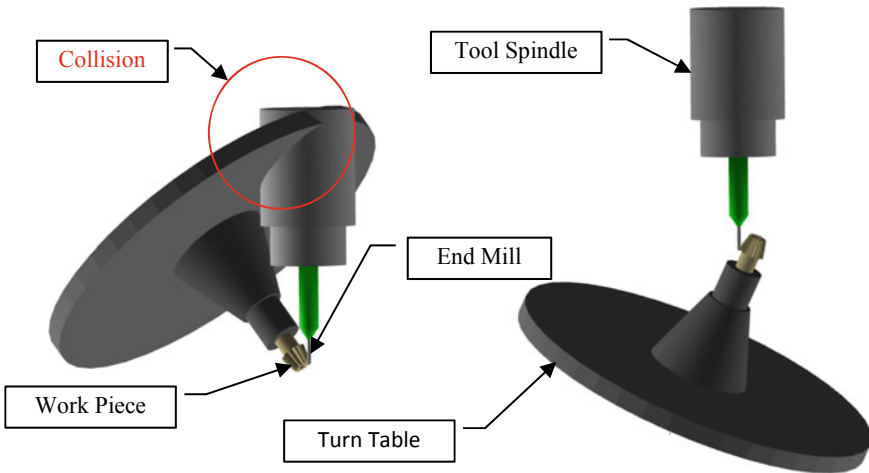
“AC” type CnC machine limits for Toe/Heel chamfering—small pitch cone angle bevel gear
